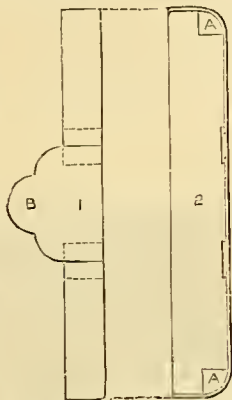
FENDER. 1, Elevation; 2, Ground Plan.
